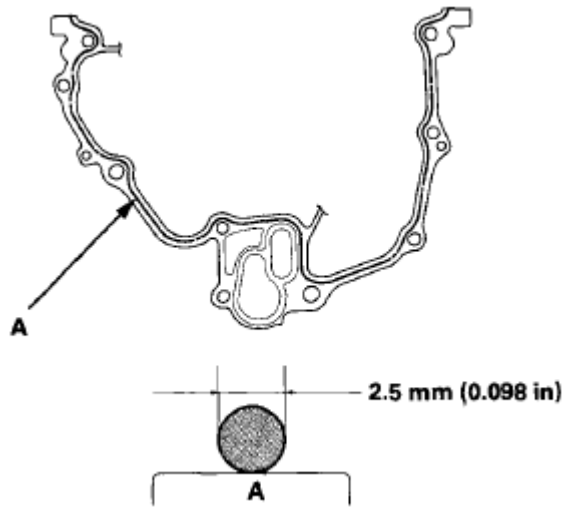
Identifying Diameter Bead Of Liquid Gasket
